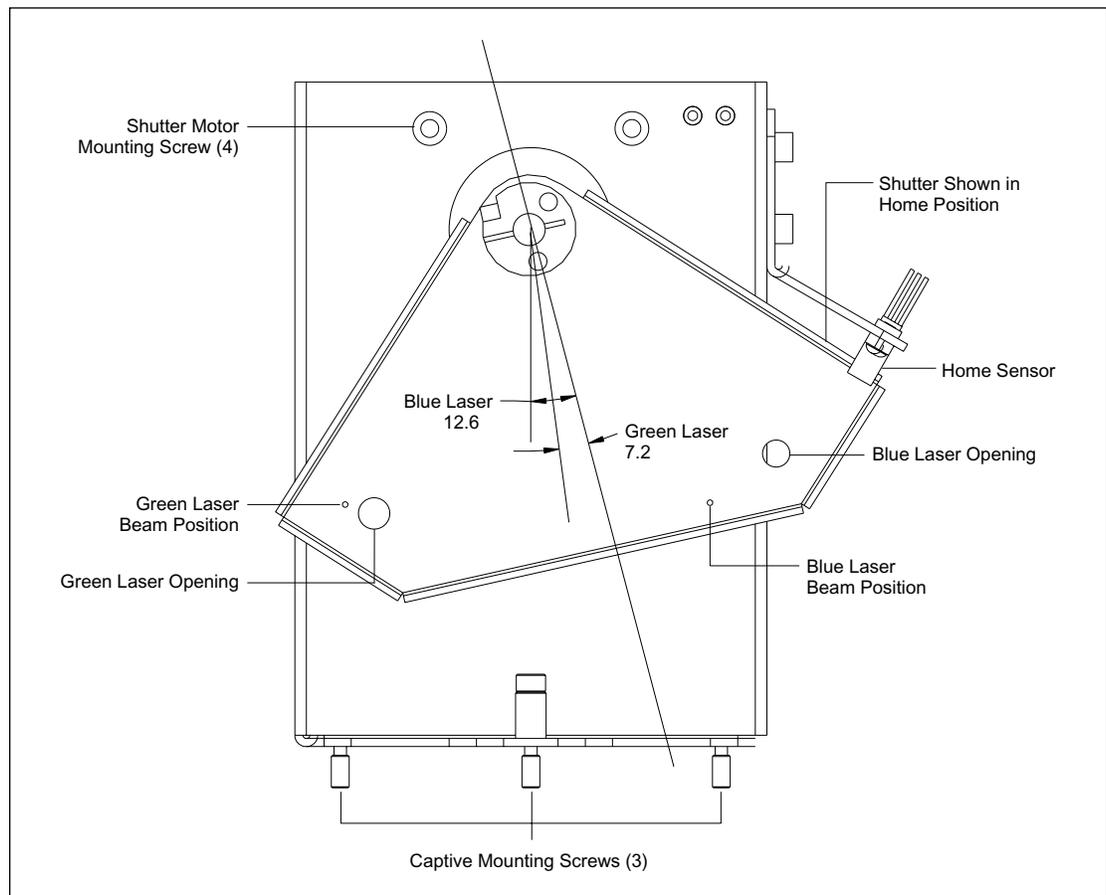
Three-Position Shutter Assembly (Sheet 2 of 2).
